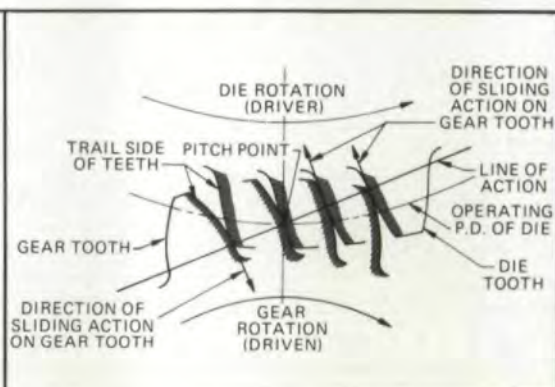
(right)—Contact action between the tooth of a workpiece and the trail side of a rolling die tooth.
